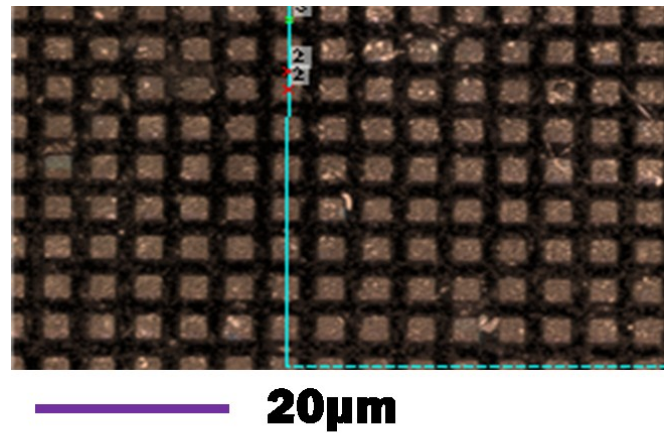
Micro-textured, DLC-coated mold-die for micro-embossing.
